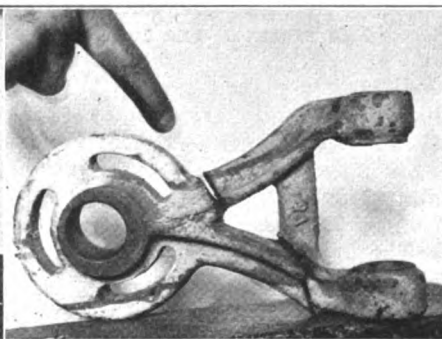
THE BROKEN PARTS ARE FITTED TOGETHER AND ALIGNED
